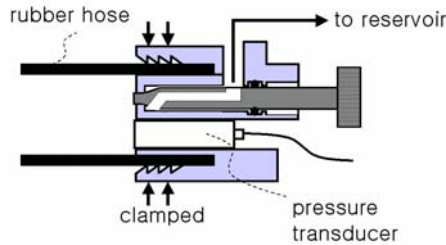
Detailed drawing of the metal fitting in position 4 of Fig. 1
